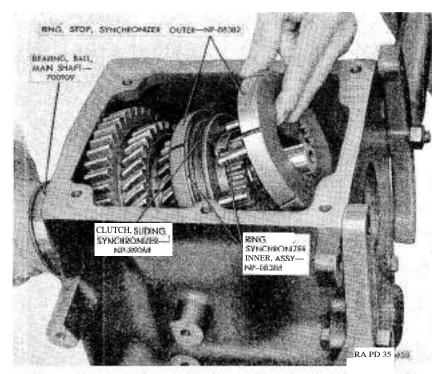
Removing synchronizers and synchronizer sliding clutch.
